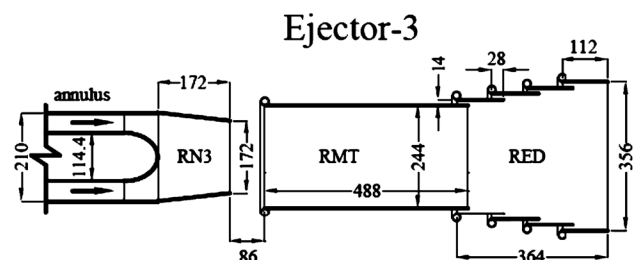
Dimensions (in mm) of Ejector 3 (E-3) [10]
